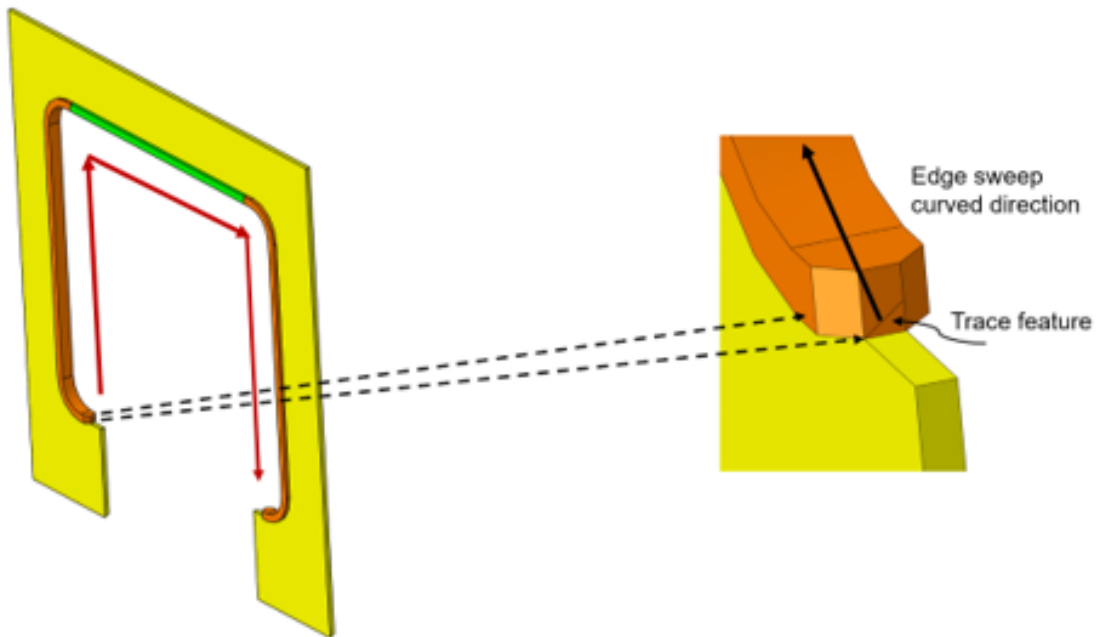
Retained boundary at the longitudinal stiffener flange due to component assemblies that need to be propagated throughout the assembly.
